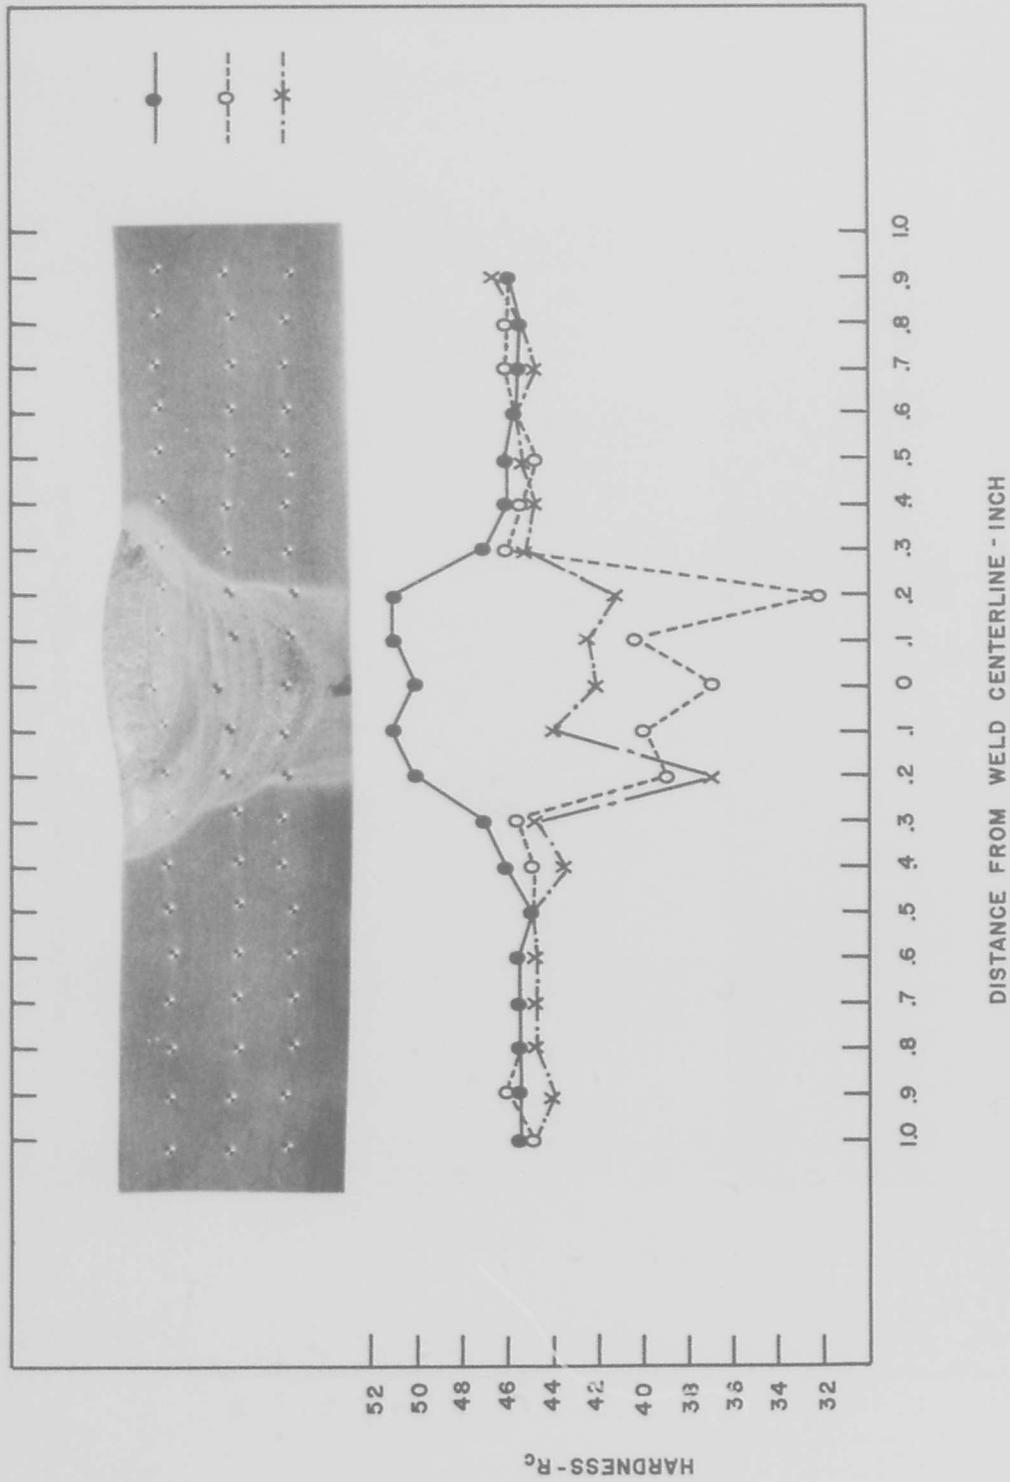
Hardness Survey of TIG Weld No. X244 Made in Vasco Jet Plate at 10 ipm Using Vasco Jet Filler Wire No. 18.
